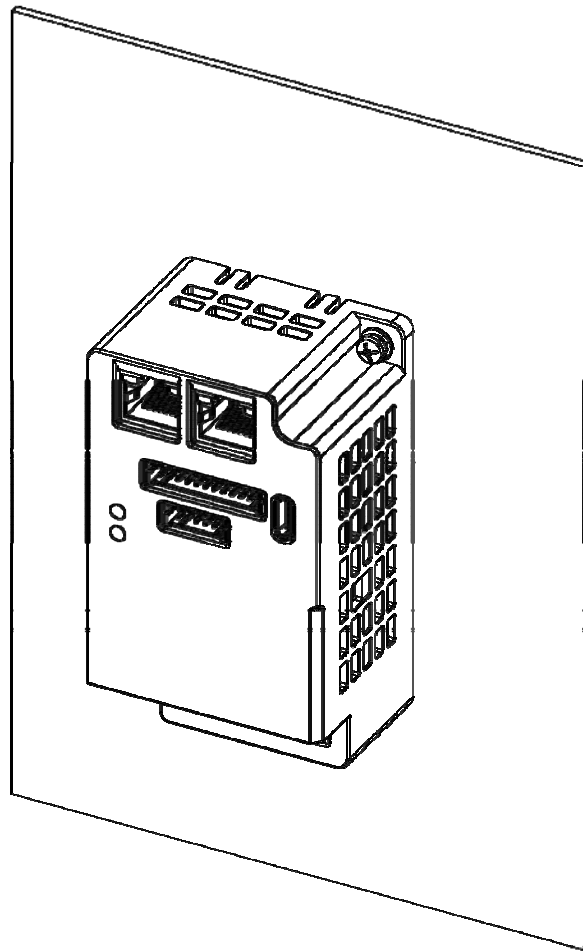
Schematic diagram of wall-mounted installation
